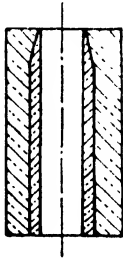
Form of tubular billet, with cast-in sleeve of tin, used in making tin-lined pipe.
